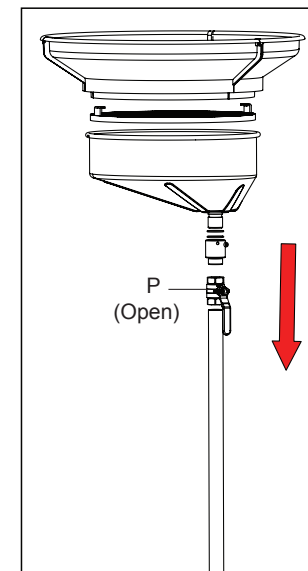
Assemble the supporting tube, ball valve (P), oil collecting bowl, filtrating plank and extension funnel orderly.
